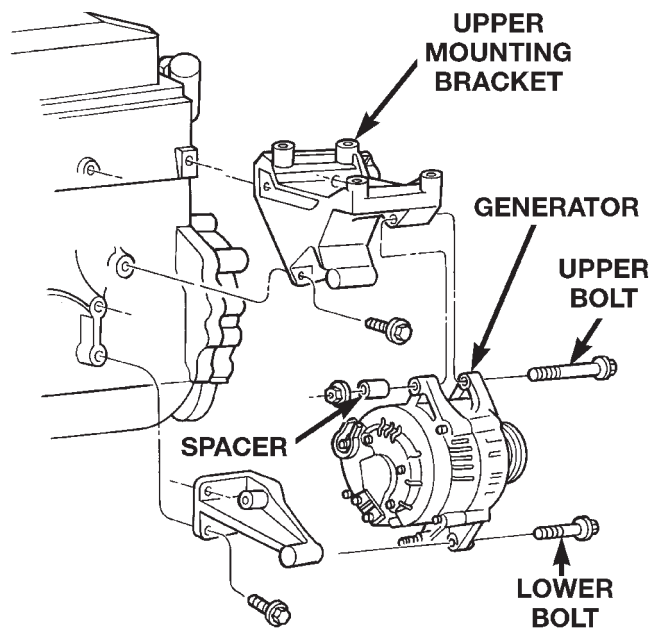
Remove/Install Generator—5.2L/5.9L Engine
